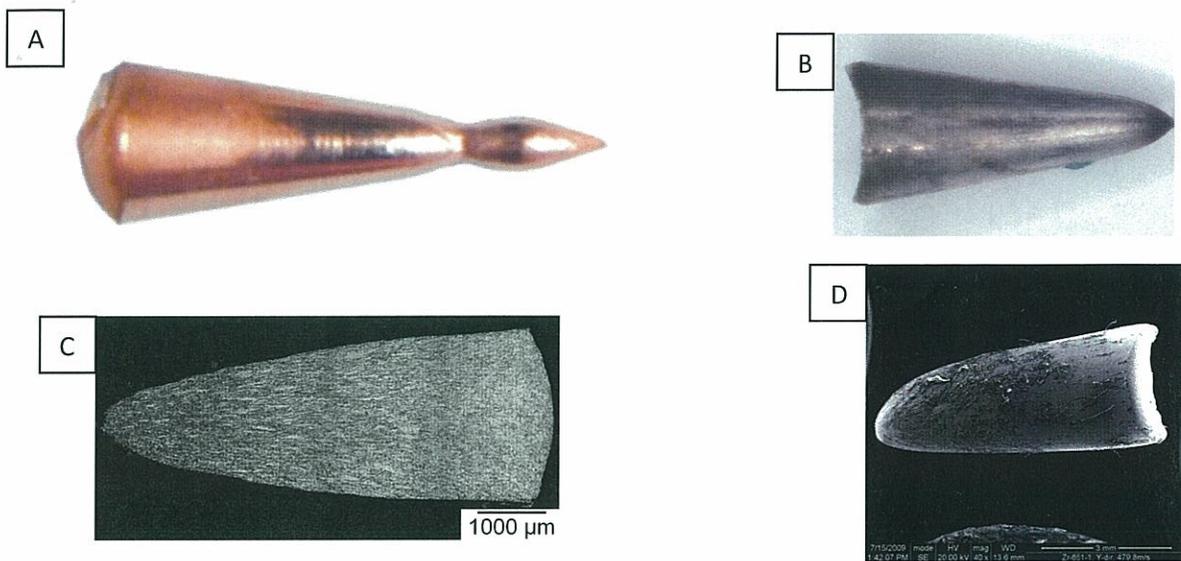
End geometry a) piece in die in a copper specimen, b) piece in die of Zr, c) first piece extruded in Ta, d) First piece extruded in Zr.
